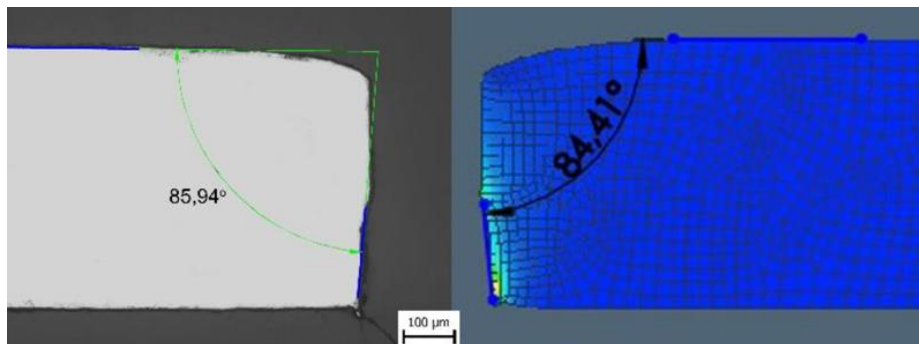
Fracture surface angle β in the shearing process when using 5% shear gap
